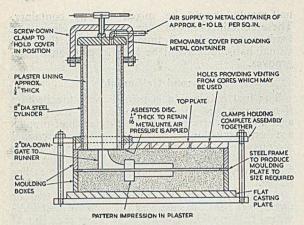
Sectional View of the Pressure-casting Equipment used for Aluminium Matchplate Production.
